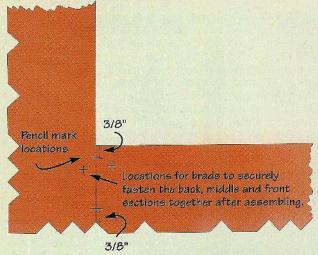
Rear view of one corner of back section of frame. Locations shown for drawing pencil lines across joint for installation of brads to strengthen assembly. Also, centerpoints are shown for drilling pilot holes for brads to be driven in after frame has been fully assembled. The holes should be drilled through the back and middle sections simultaneously. Trim ends off brads as needed to prevent tips from protruding through the front of the frame.
